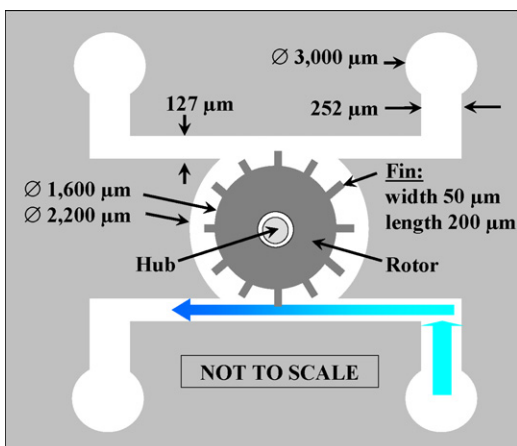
Microbearing assembly schematic depicts nitrogen gas flowing through one channel in order to rotate the rotor.
